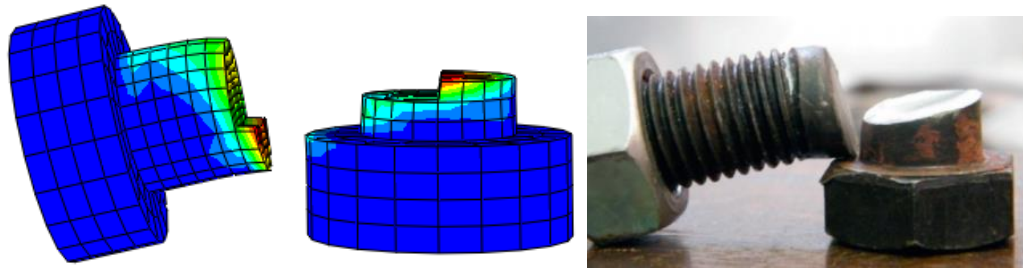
The simulated shear fracture and the test photo of bolt failure
